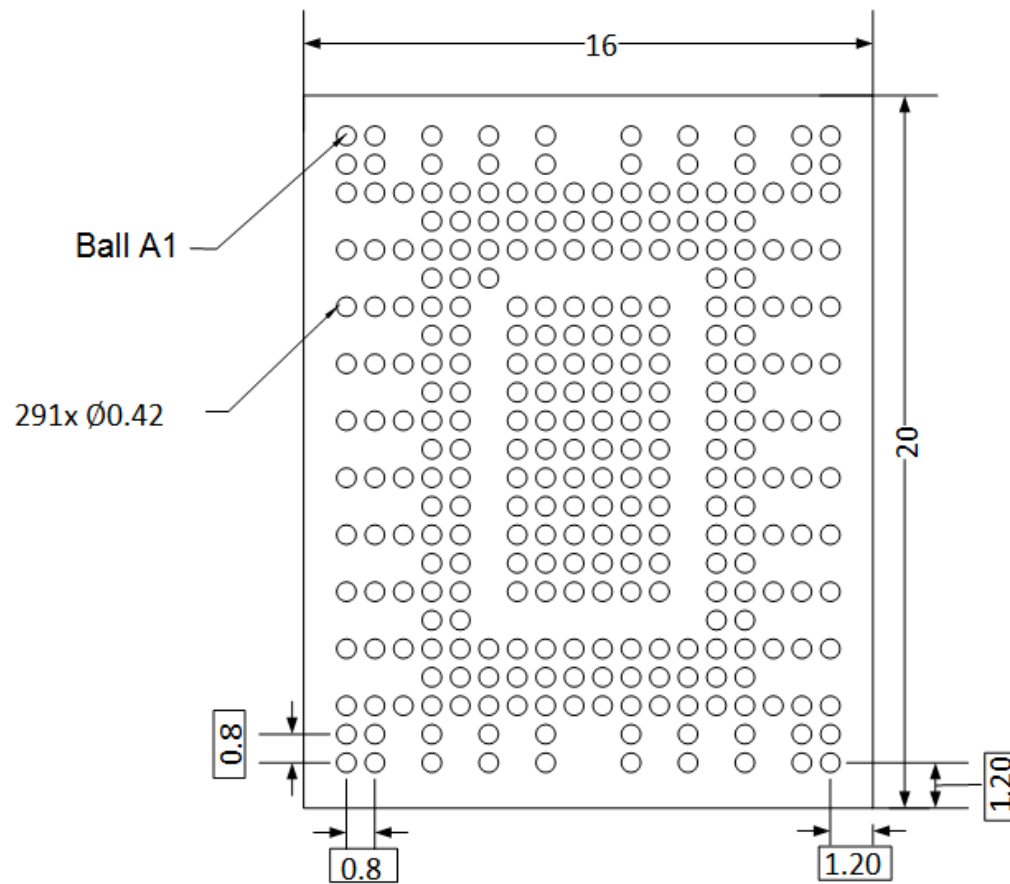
Recommended Land Pattern for M.2 Type 1620 BGA (Top View)
